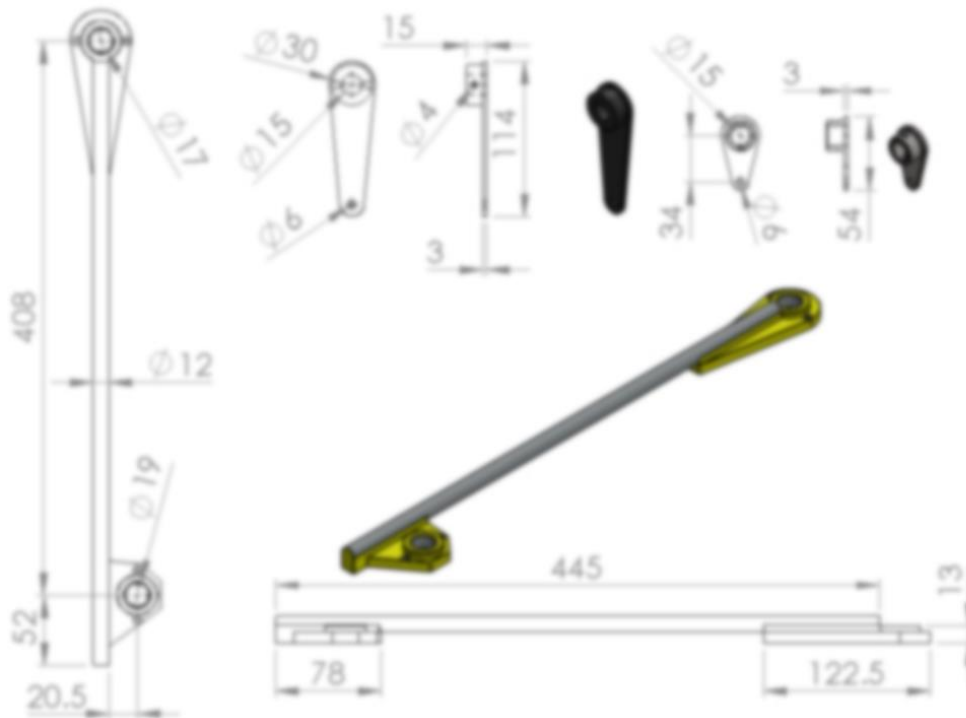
Mechanical Design and Dimensions of The Crankshaft
